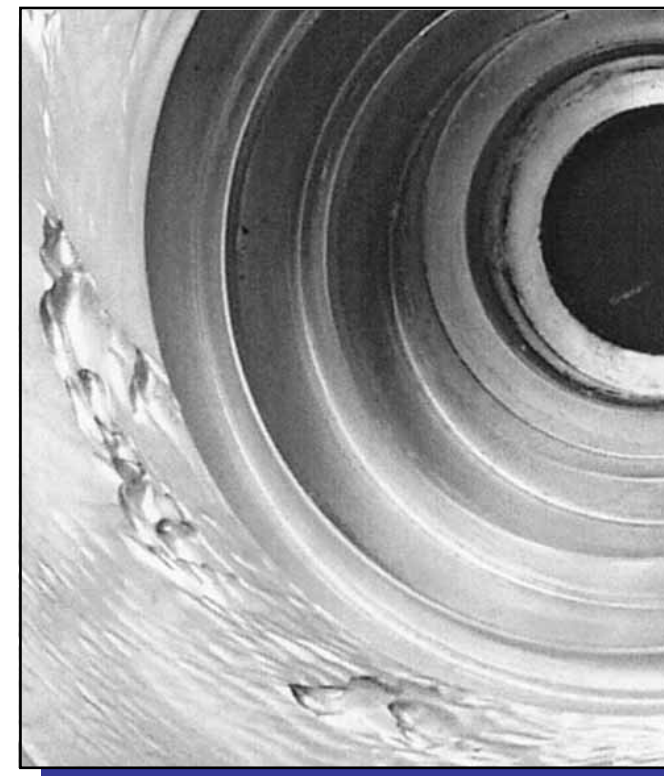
Results after 80 hours, Significant wear on Impeller face, No Wear in Grooves or Seal Area. (Testing performed on Aluminium Cyclone Seal Chamber at 3550 rpm.)
